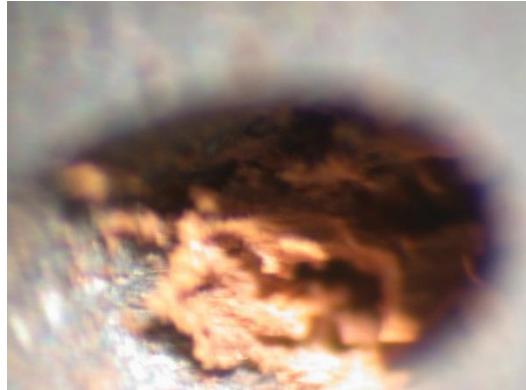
Blocked cooling hole in HD45, 1050°C
